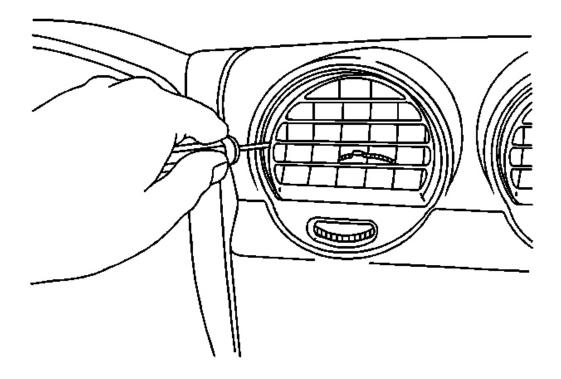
Removing Left Housing Retaining Pin Courtesy of GENERAL MOTORS CORP.
